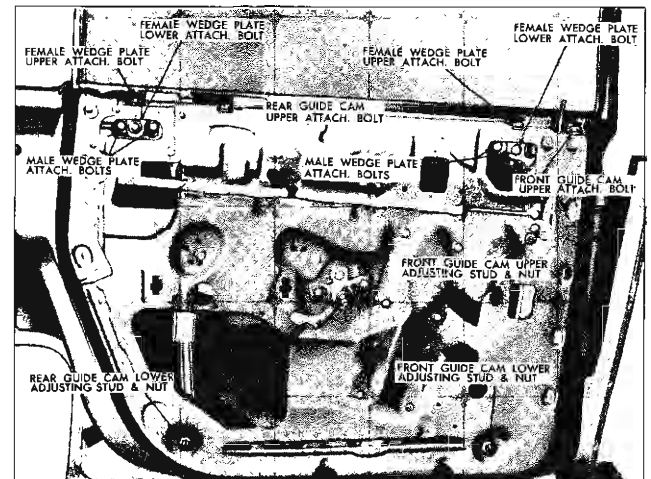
Guide Cam and Wedge Plate Attachment
